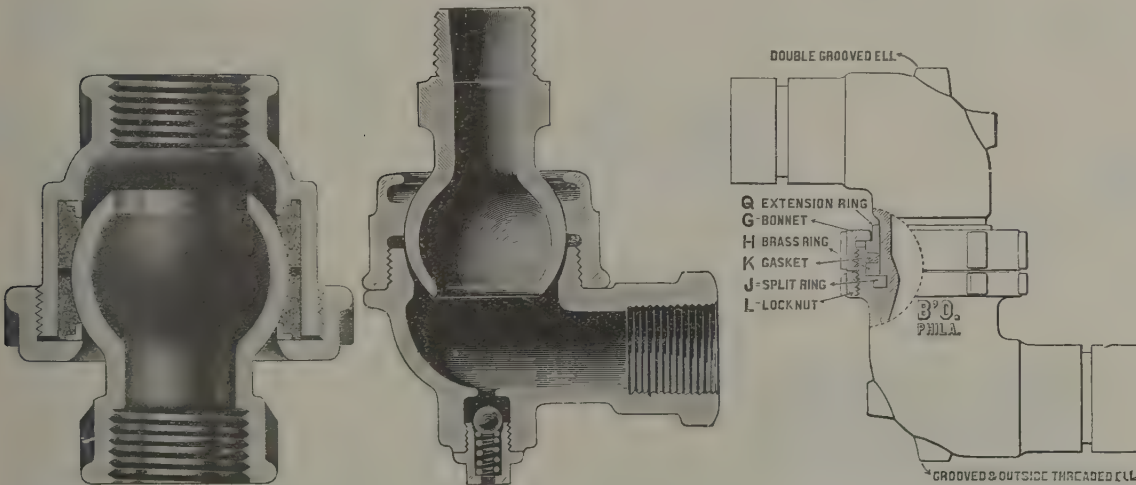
Flexible Joint. Barco Brass & Joint Company.
